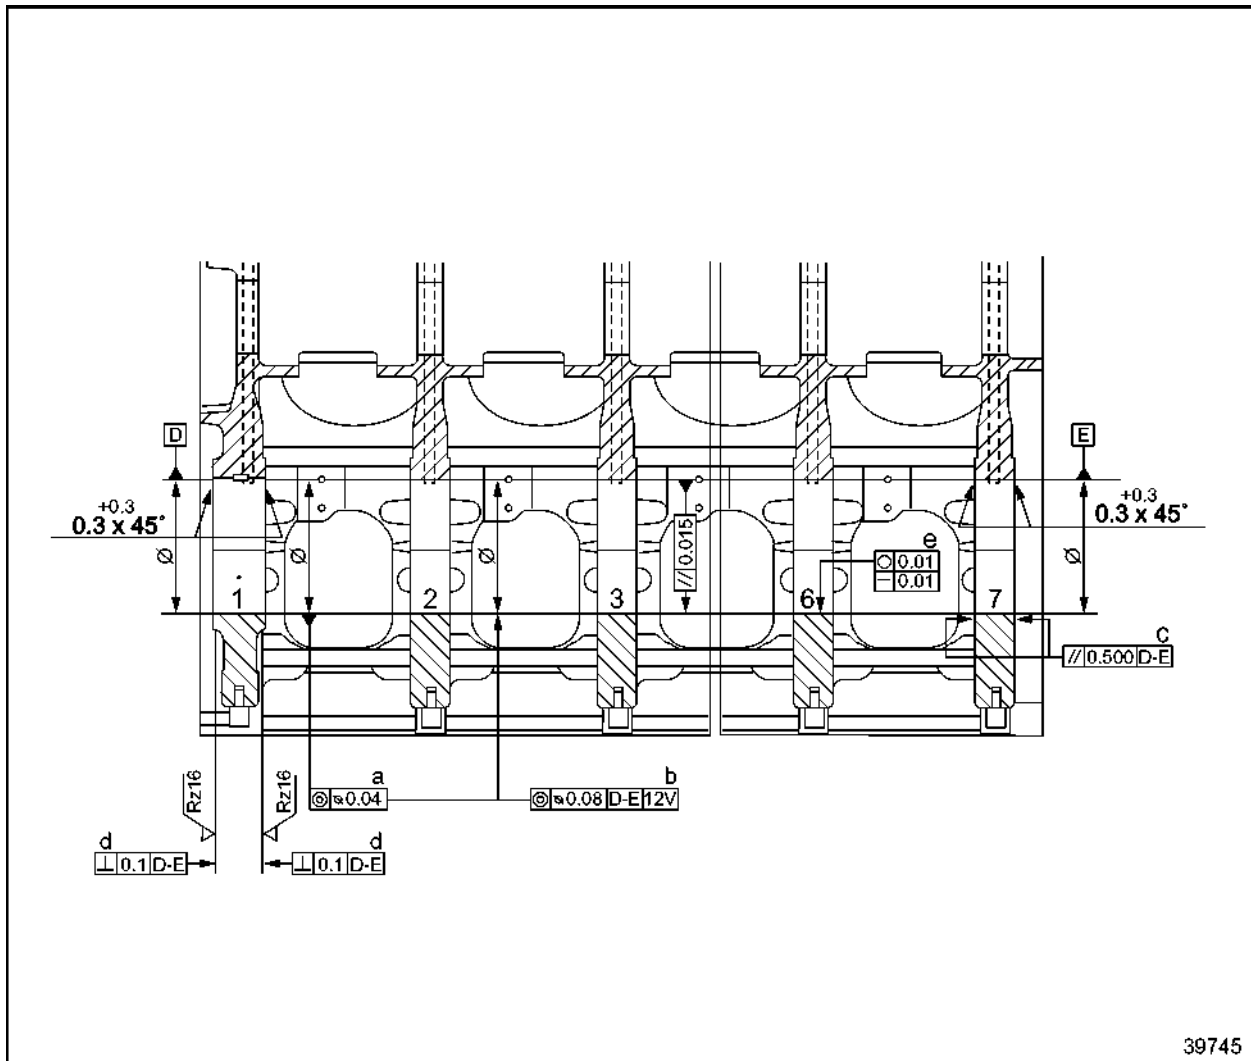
Coaxial Tolerance of Cylinder Block Bores for Crankshaft Bearings
